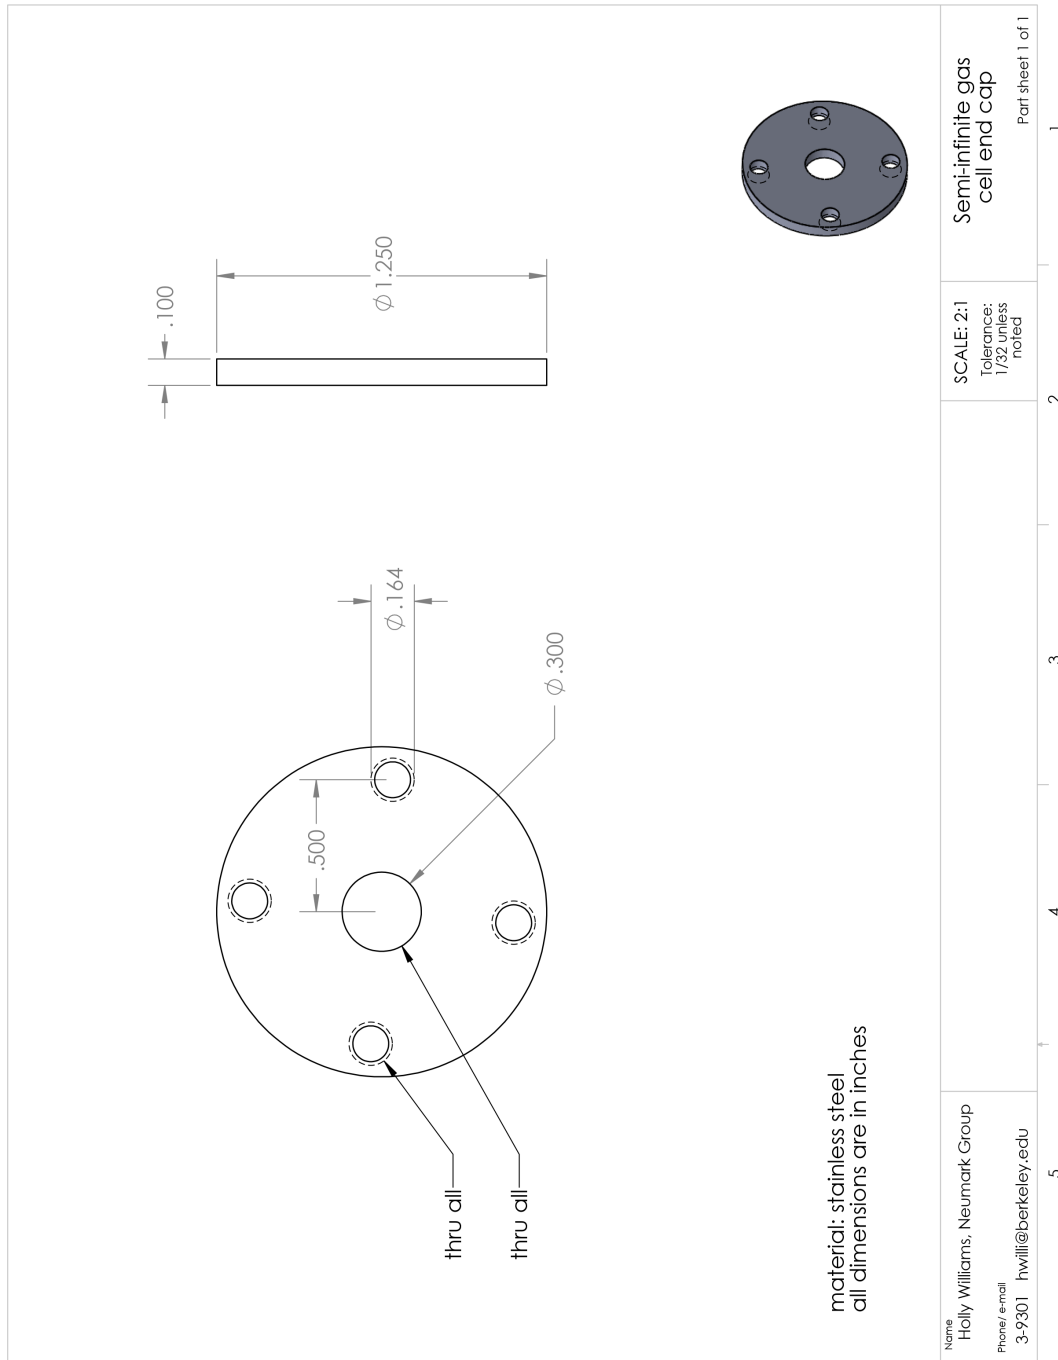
SIGC end cap machine drawing, and is made from stainless steel (304 SS).
